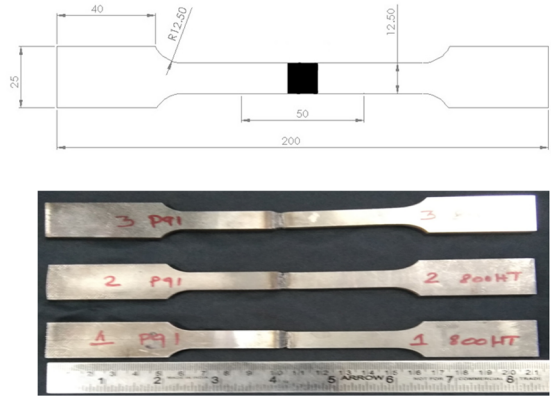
Tensile specimens ASTM E23 standard dimension and after testing
